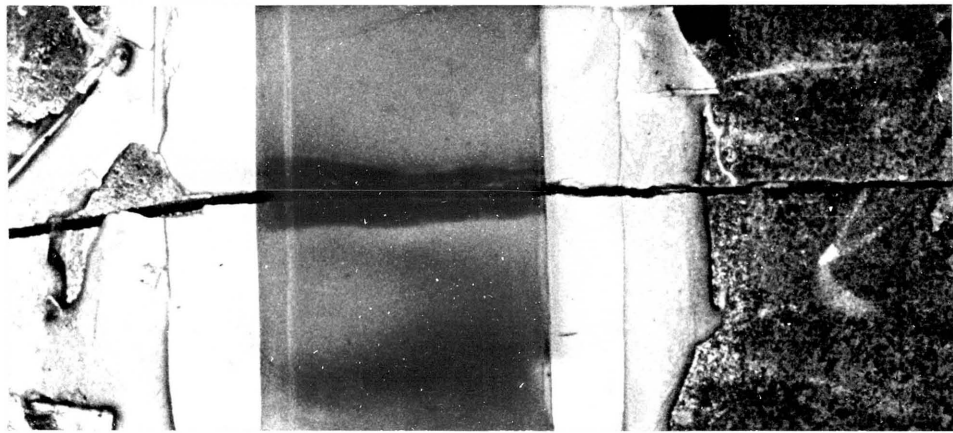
Residual birefringence after fracture in the photoelastic coating on the specimen shown in fig. 7.22.
